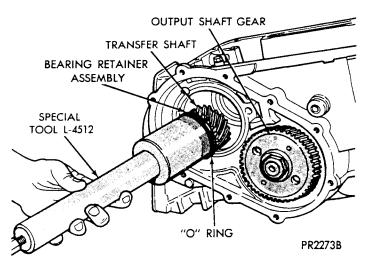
Remove or Install Transfer Shaft and Bearing Retainer Assembly
